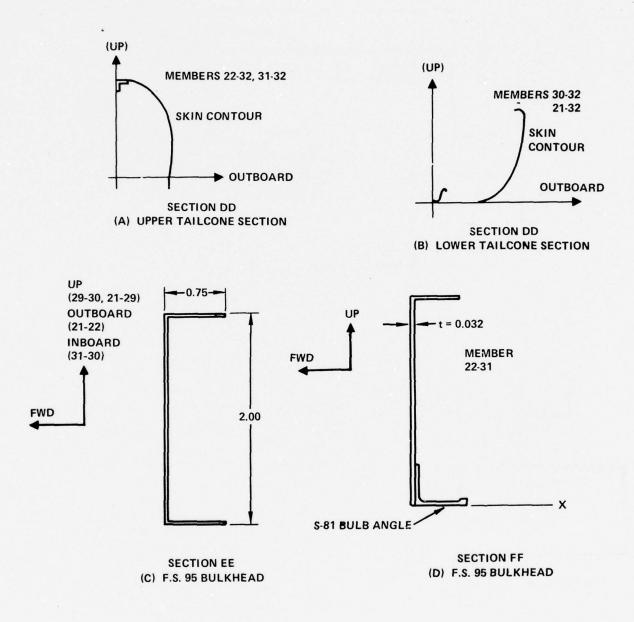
Tail Cone and F.S. 95 Bulkhead Structure Cross Sections
